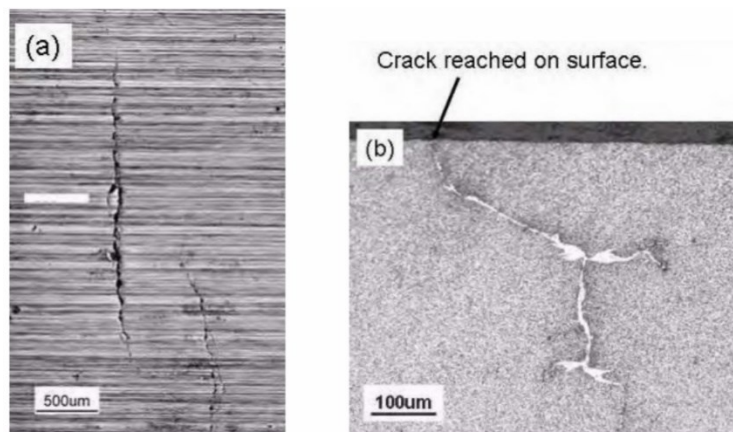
Axial cracking on a failed wind turbine gearbox bearing. (a) Axial cracks on the raceway surface; (b) The cross-section through the cracks [40].
